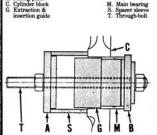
Installation of front or rear main bearing requires use of Yanmar special tool number 124085-92400 for all models except 3HM which requires special tool number 128670-92400. Install special tool as shown and pull new bearing into place being careful not to distort new bearing.
